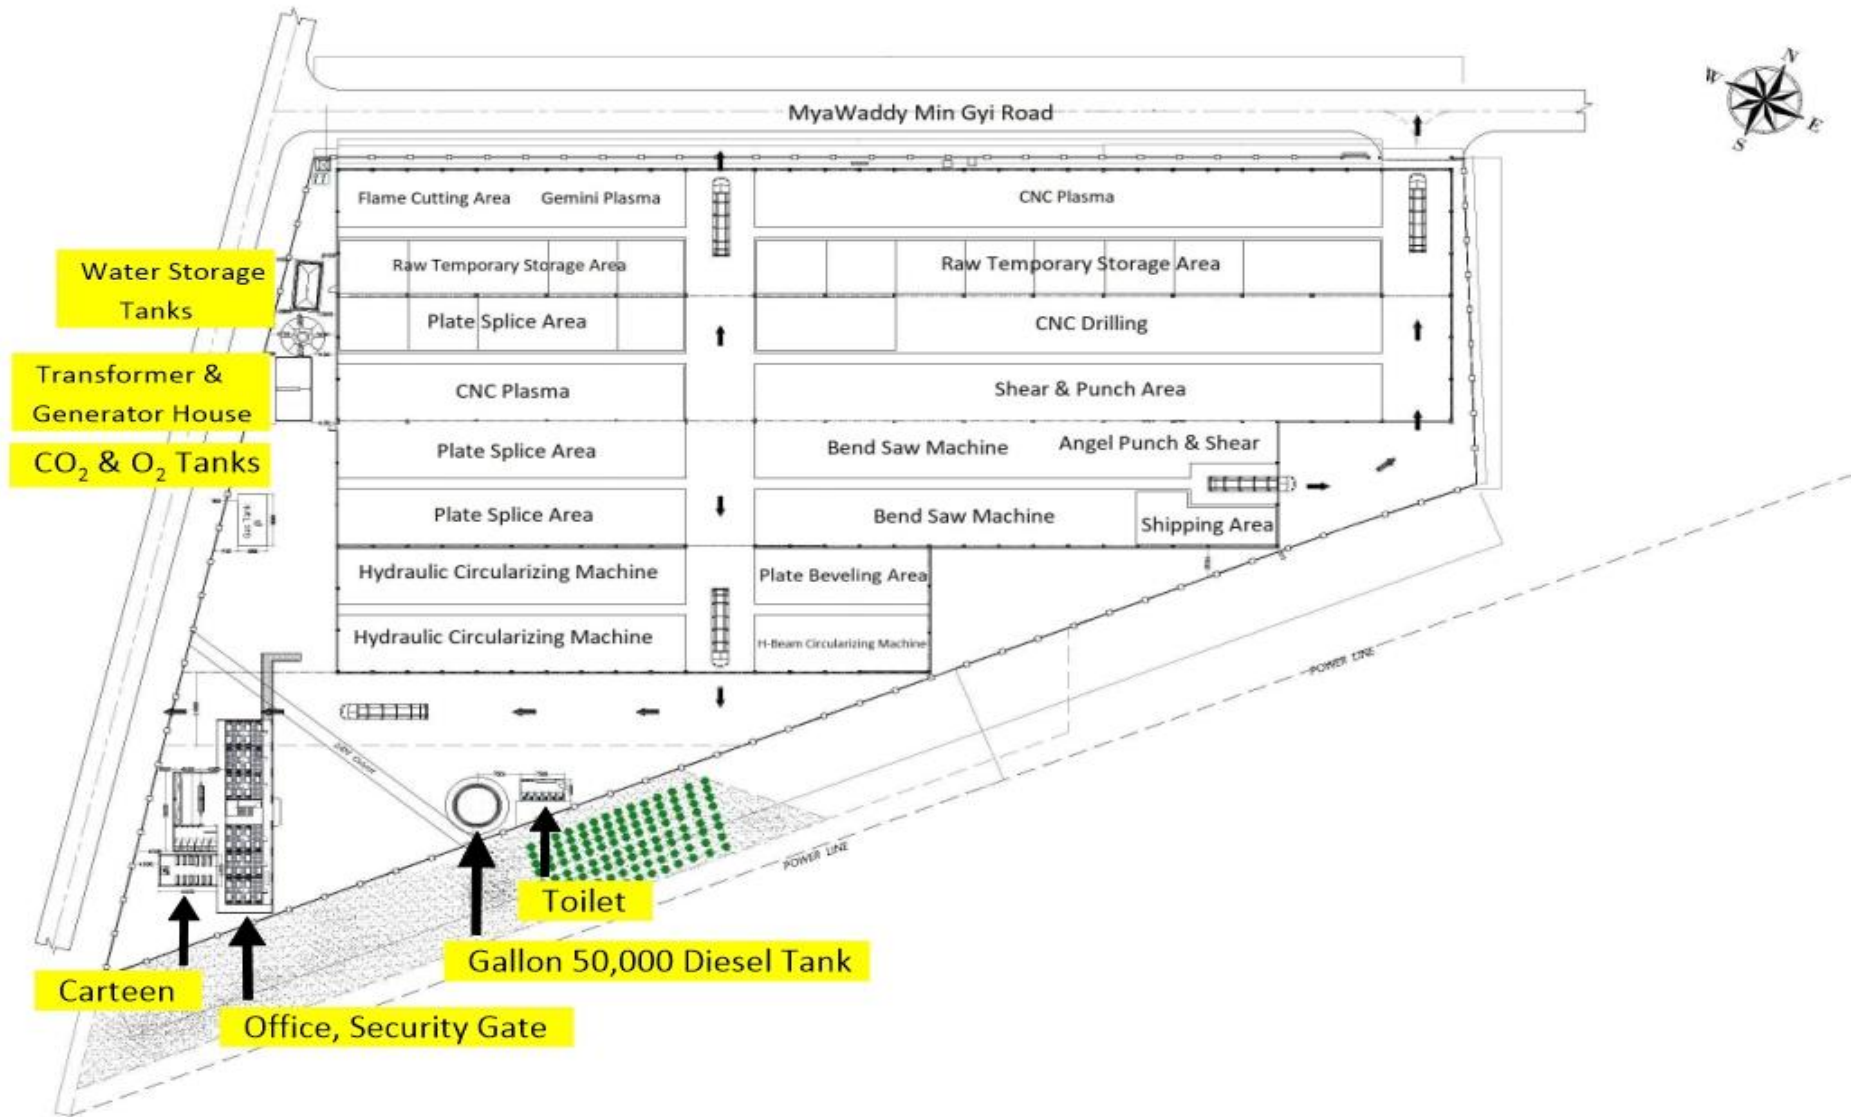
Factory Layout Drawing of Min Dhama Steel Structures Company Limited
